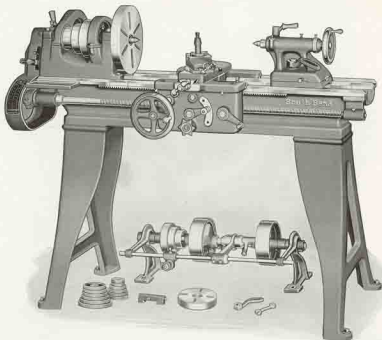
Cat. No. 10-A, 11" x 4' Series "R" Standard Change Gear Countershaft Drive Lathe complete as shown.....\$383.00
